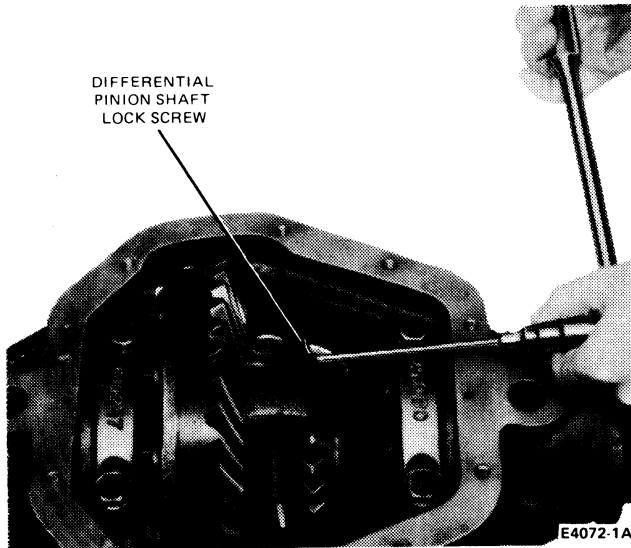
Removing Differential Pinion Shaft Lock Screw
